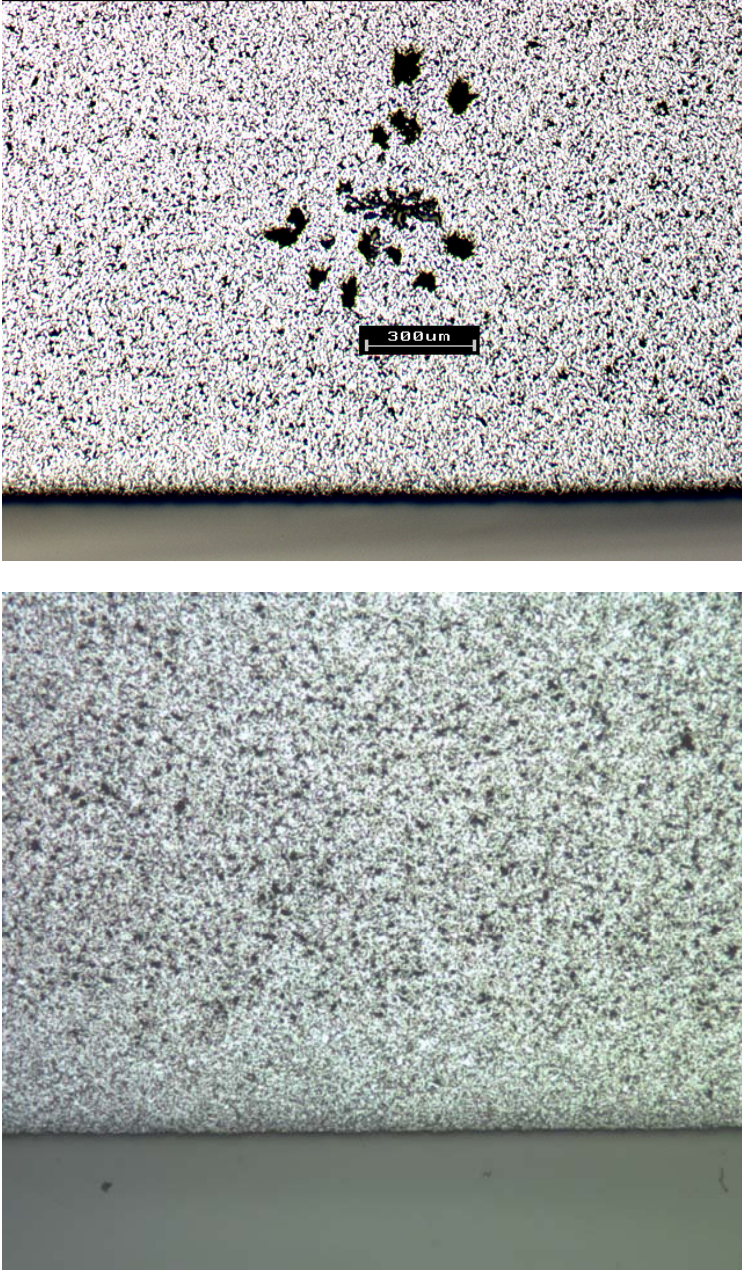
Optical micrographs showing cross-sections of sintered closed end pieces for HPD tubes: (top) before die improvements and (bottom) after die improvements
